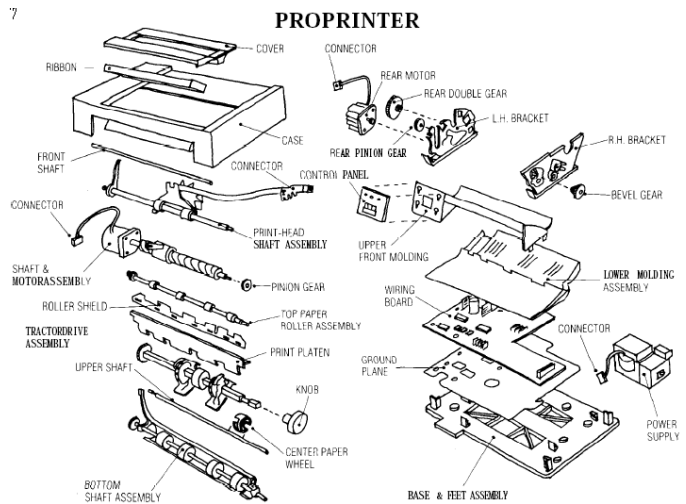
Exploded view of IBM ProPrinter highlights design simplification in this product.
